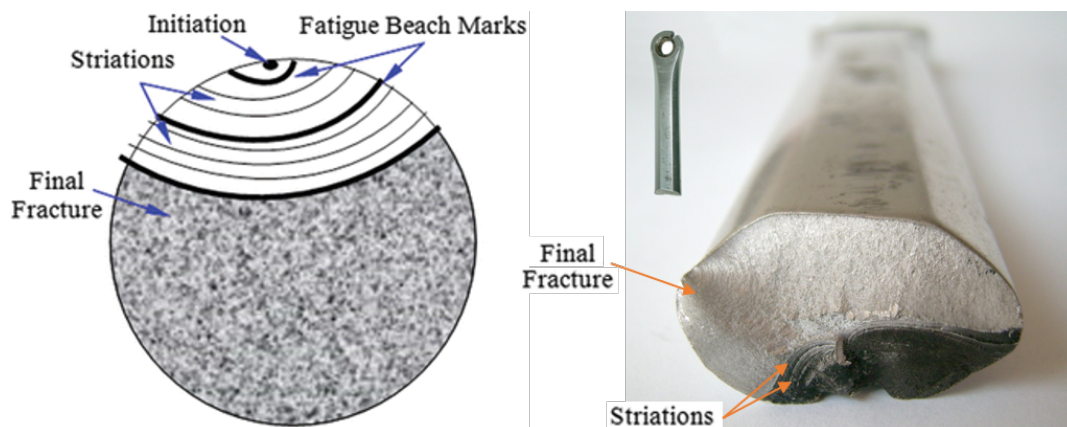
Schematic drawing (left, [83]) and photo of a fatigue failure surface (right, adapted from [69]). The different zones in the failure surface are labeled.
